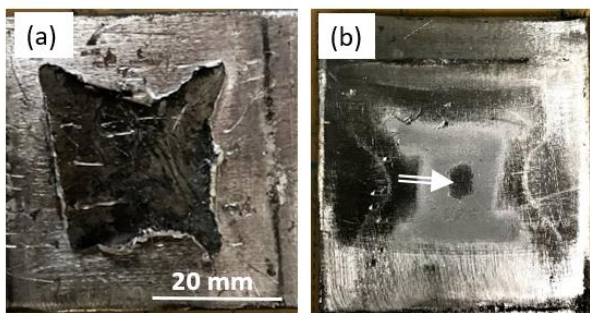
Spot welds of 6061-T4 (a) and 6061-T4 (b) to 4130 steel after pry test. T4 condition failed a nugget and T6 condition was peeled off leaving a hint of welding. The arrow in (b) represents the unwelded region found in the center of the spot weld.
